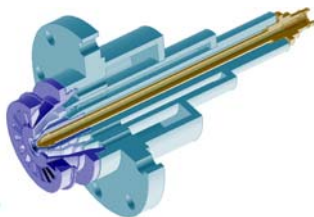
3-dimensional drawing of GE7EA gas turbine fuel nozzle
